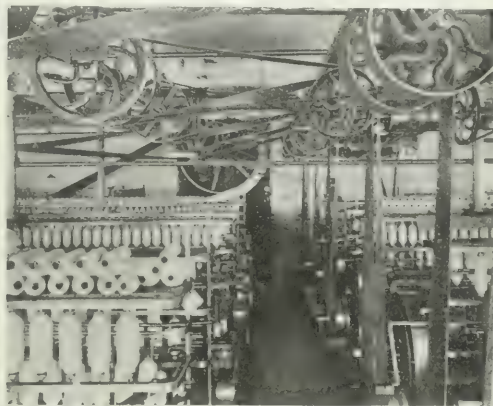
SPINNING MILL OF SHAW JARDINE.
